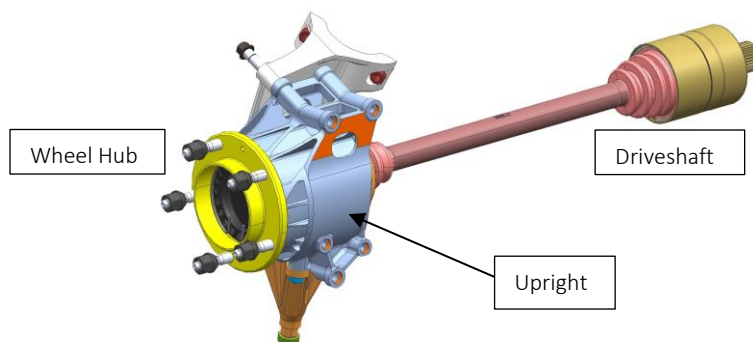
Complete Wheel Hub, upright and driveshaft
